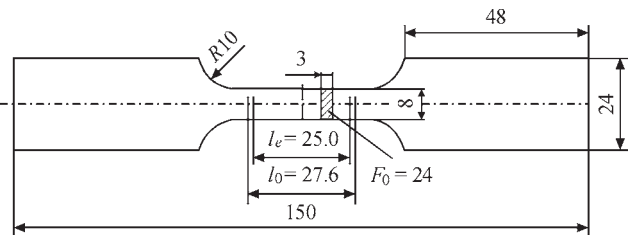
Sample for tensile tests: l_e — extensometer gauge length; l_0 — original gauge length; F_0 — original cross-sectional area
